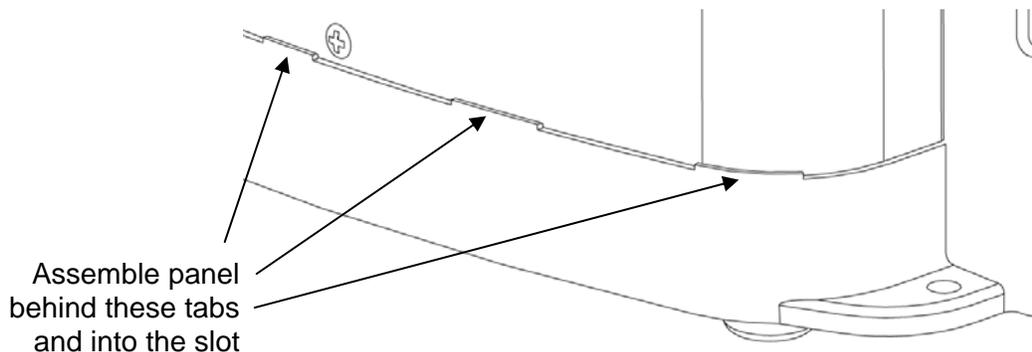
ASSEMBLE PANEL BEHIND TABS
